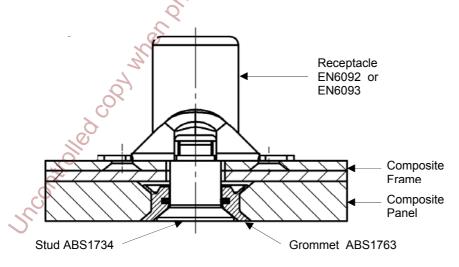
Example of final assembly -2 - start tapered quick release system (composite panels with grommet)
